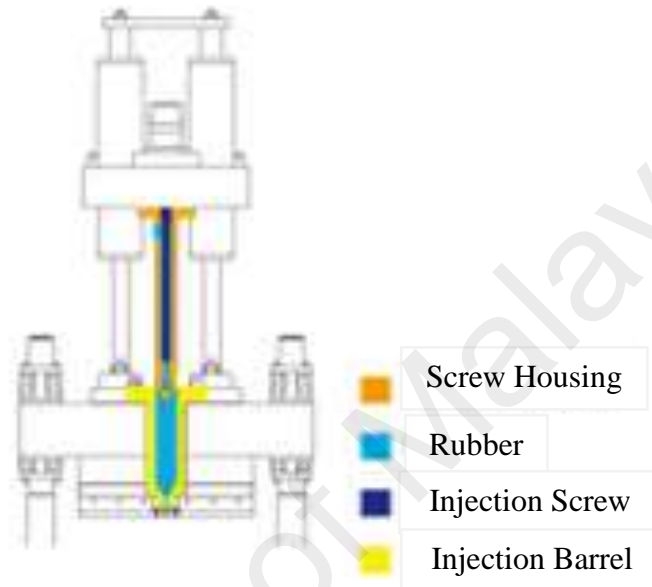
Vertical type of rubber injection moulding machine. Schematic diagram from Pan Stone Hydraulic Indus. Co. Ltd.
